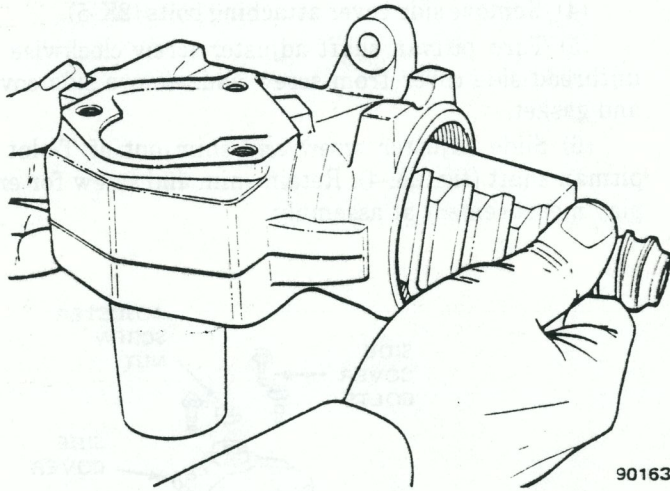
K-5 Wormshaft and Ball Nut Removal/Installation
